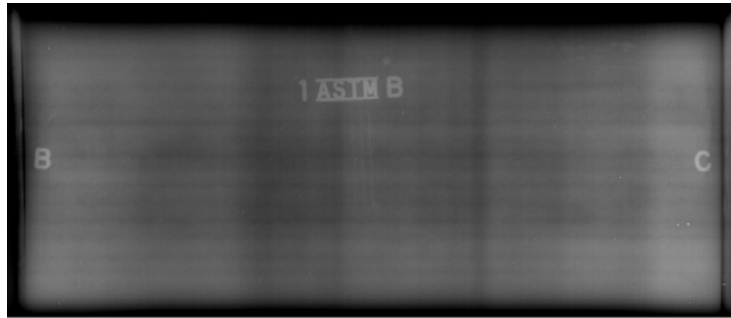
X-ray inspection of the 5-layer Nickel clad on SS316H
